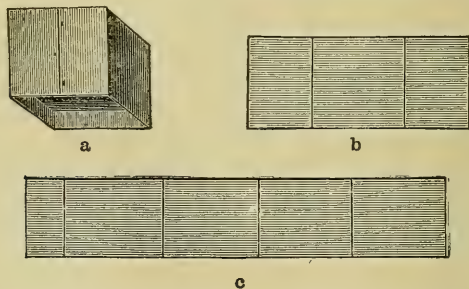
Berry box and the two pieces of which it is made. A, complete box; b, piece forming the bottom; c, piece forming the sides.
